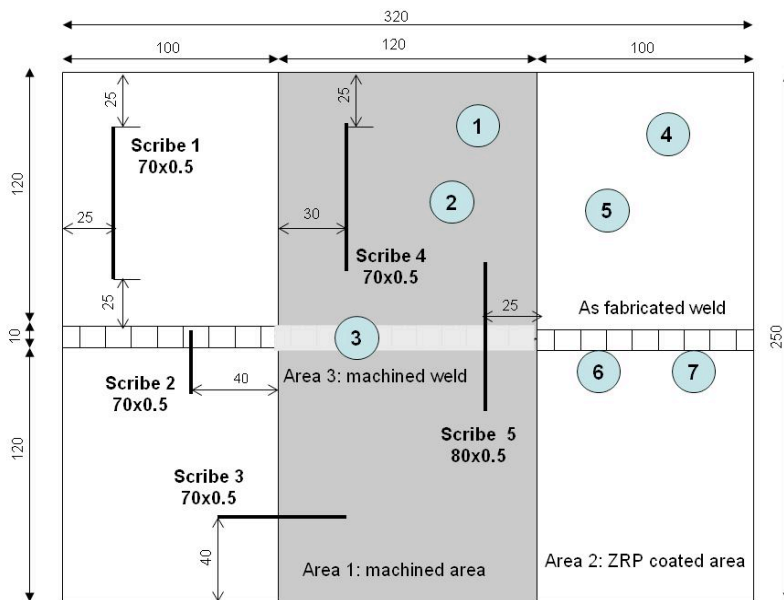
Position of the scribes and pull-off test dollies on the welded test panel (dimensions are given in mm)
